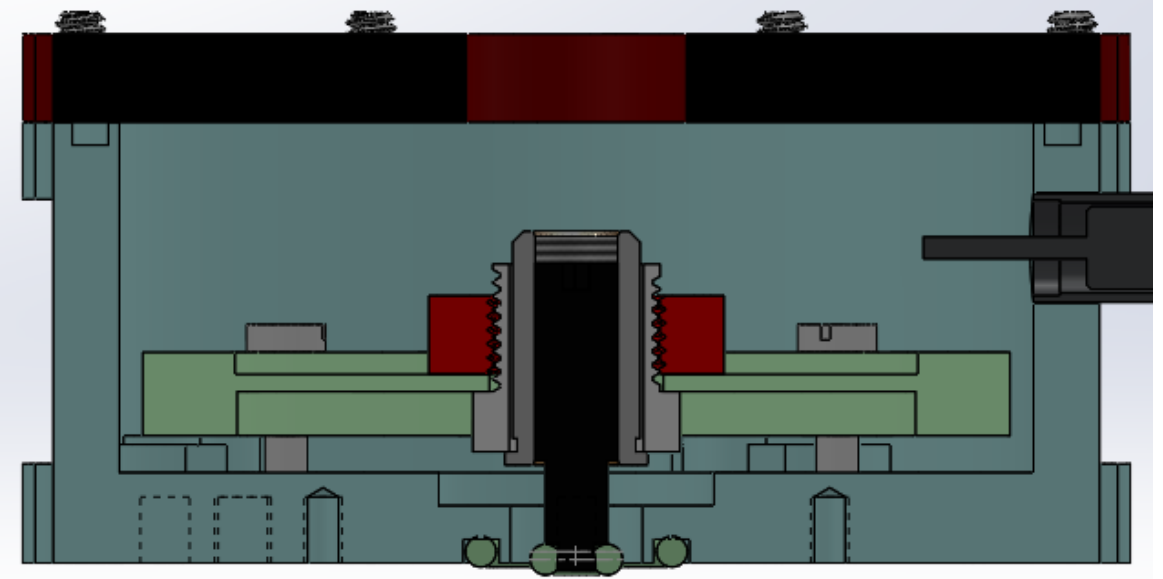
Cross-section view of the high pressure cell and PZT assembly. The gas mixture is introduced from above, and the source chamber is located below.
